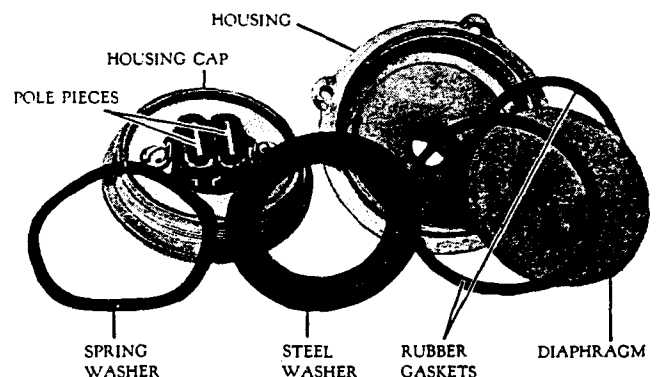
HORN TYPE UNIT, DISASSEMBLED.
